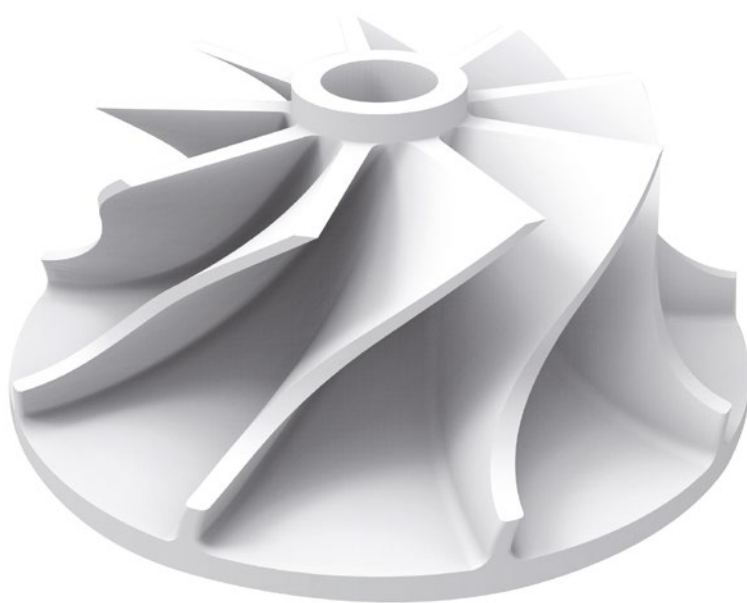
The process is capable of near-net-shape manufacturing, so some parts, such as turbine blades, can be printed directly. (© 3DCeram)
